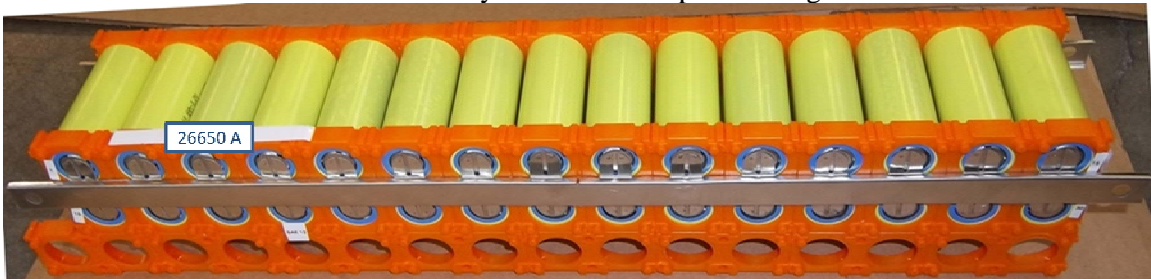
Thirty 26650 cells assembled using welded bus bars for module assembly
